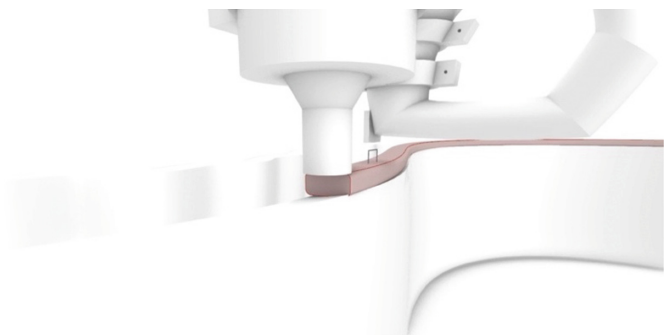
First tool mounting setup; stapling TCP trailing printing TCP.
